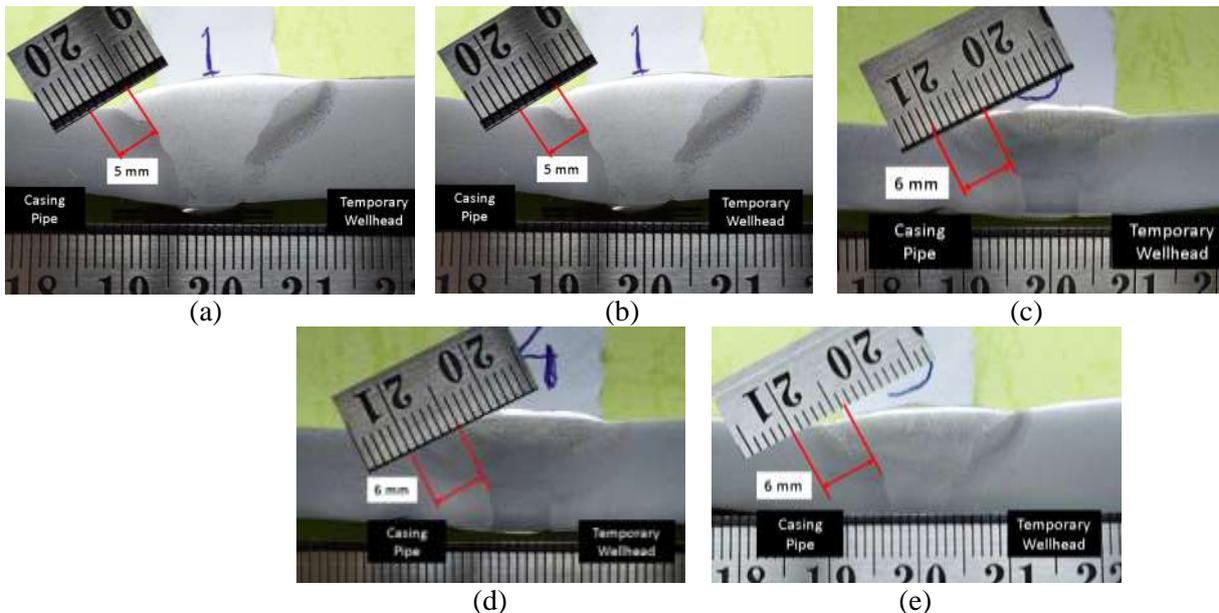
HAZ of the cross section of (a) Specimen A, (b) Specimen B, (c) Specimen C, have the same width, 5 mm. And (d) Specimen D, (e) Specimen E have the same width are 6 mm
